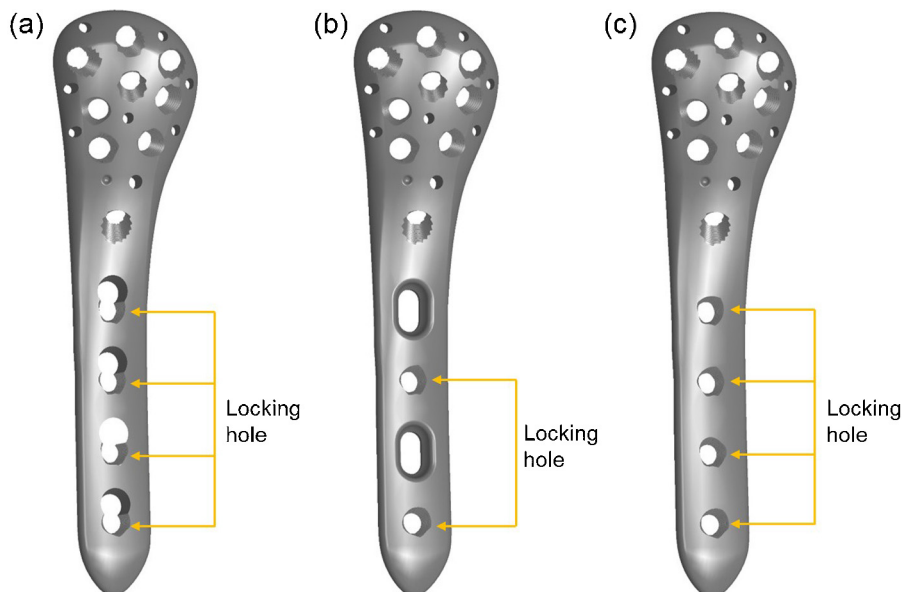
CAD models of three humerus plates involved in the study. (a) Combi design; (b) locking and standard holes separated; and (c) locking hole only.
